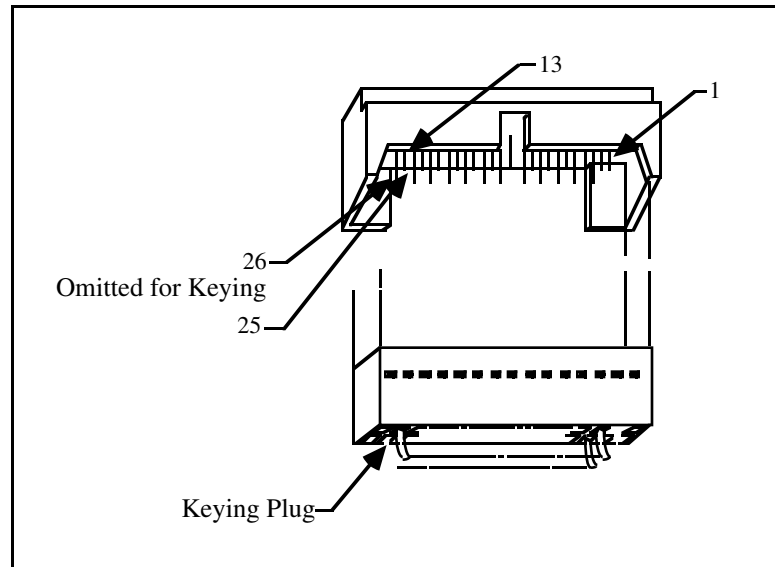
GPIB-SBX Cable-to-Interface Board Connection
